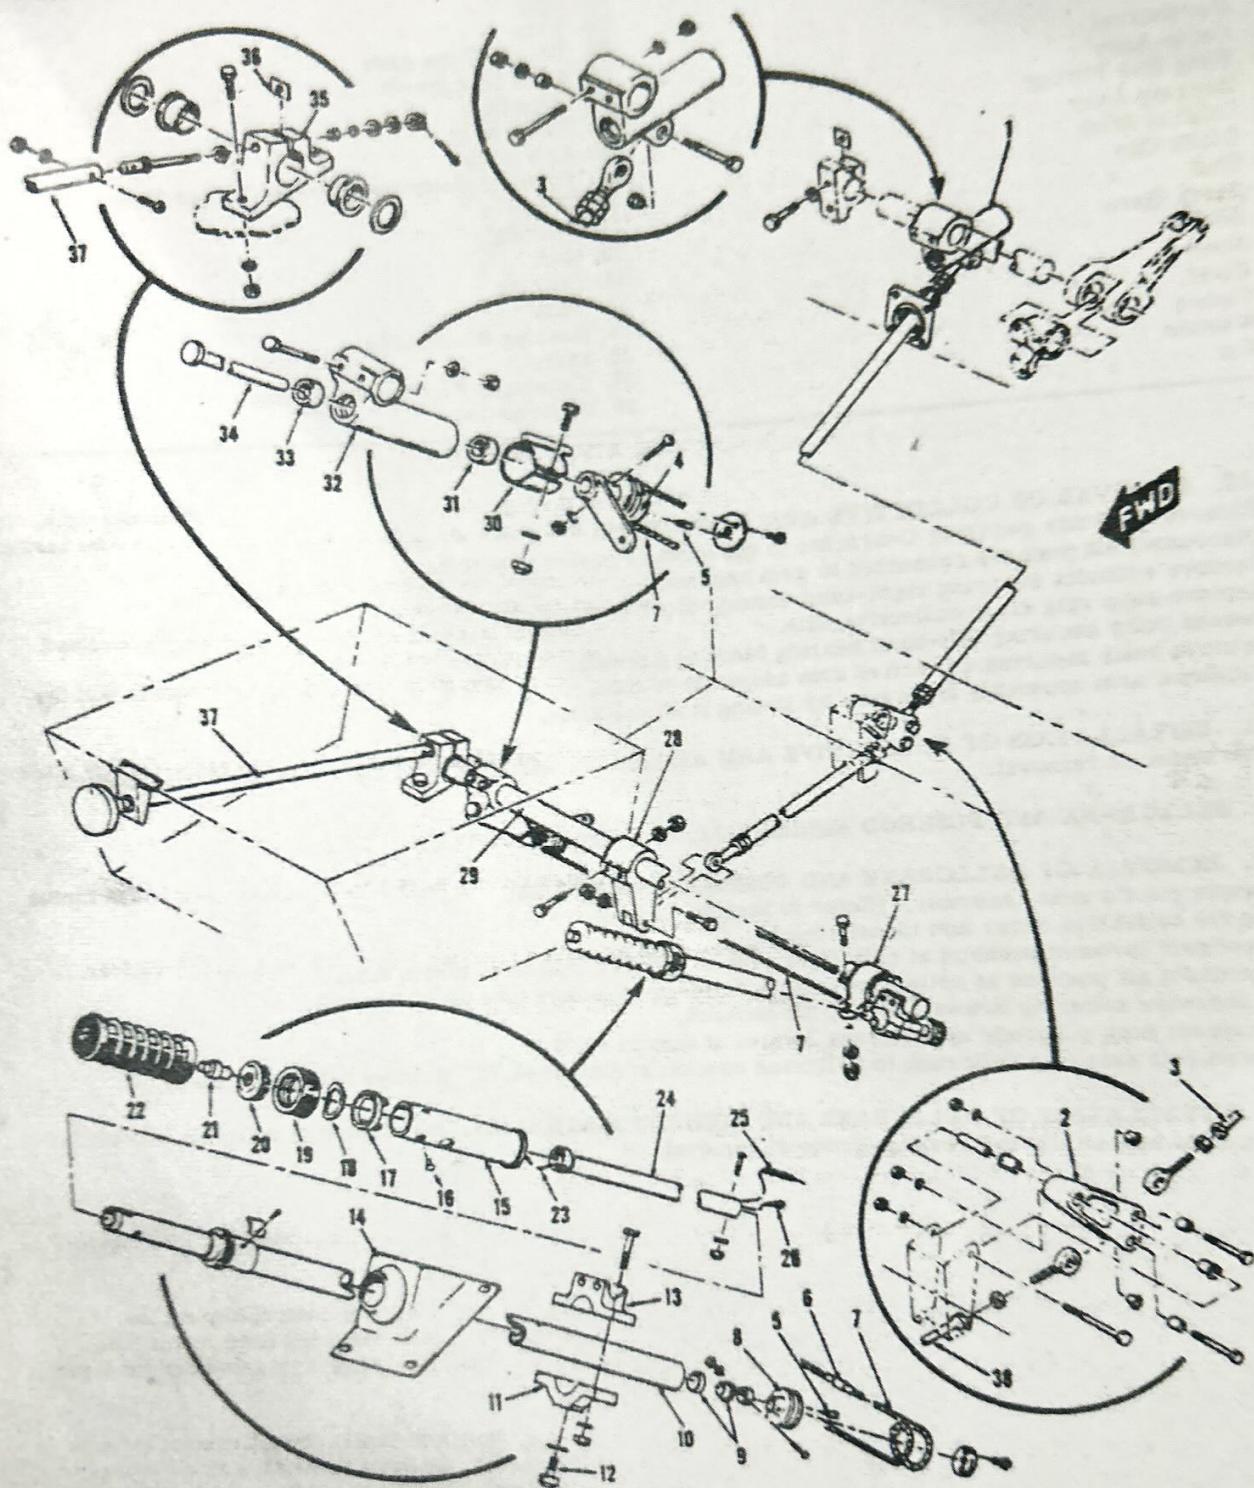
Collective Control Installation, Four-Place Configuration, (Exploded View)
